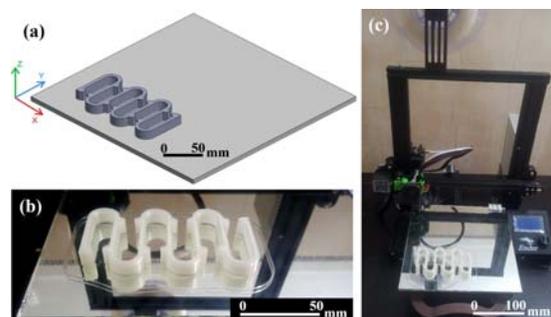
The 4D-printed spring specimen produced of eSUN 4D filament e4D-1 white shape memory polymer: a) the CAD model of the spring specimen (isometric view, solidworks program); b) location on the tray; c) the spring specimen inside the 3D-printing machine
